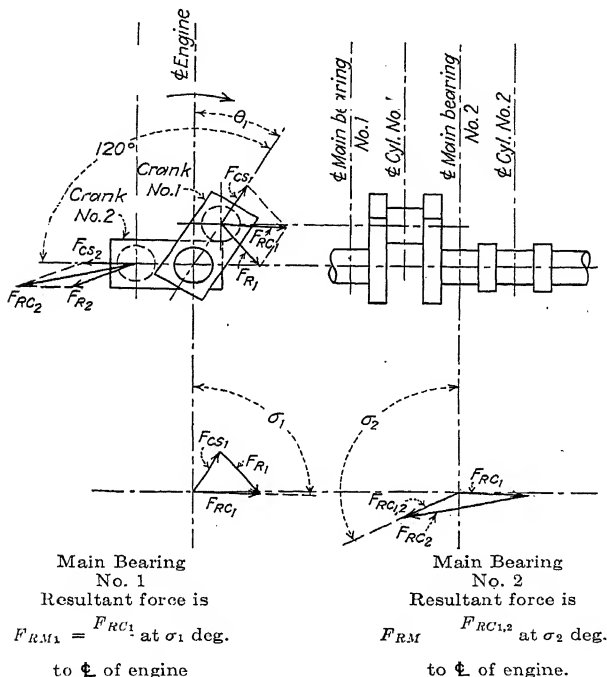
Method of finding resultant forces on the main bearings of in-line engines. (Six-cylinder crankshaft illustrated.)
